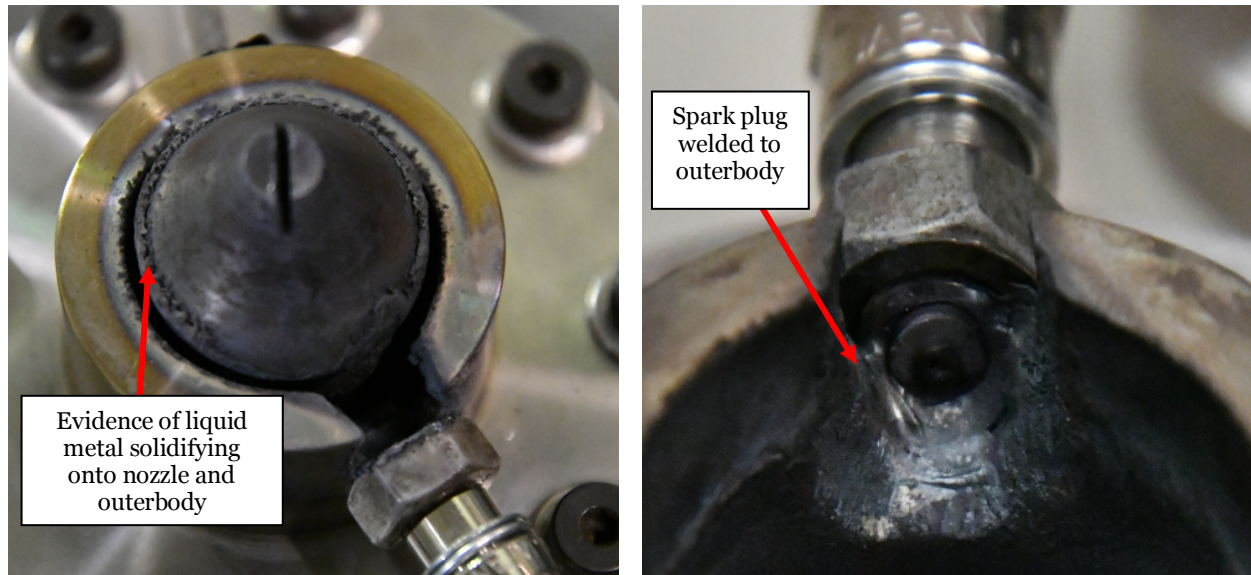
Outerbody erosion damage after 2.44s run. Evidence of liquid metal solidifying on exit edge and nozzle throat (Left). Spark plug welded to outerbody (Right).
